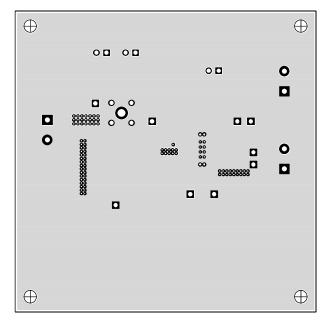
Bottom Side Layout (Looking From Top Side)
